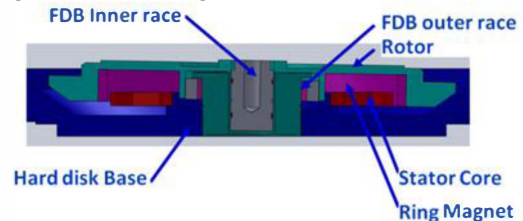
The start-up condition of spindle motor with FDB in hard disk
